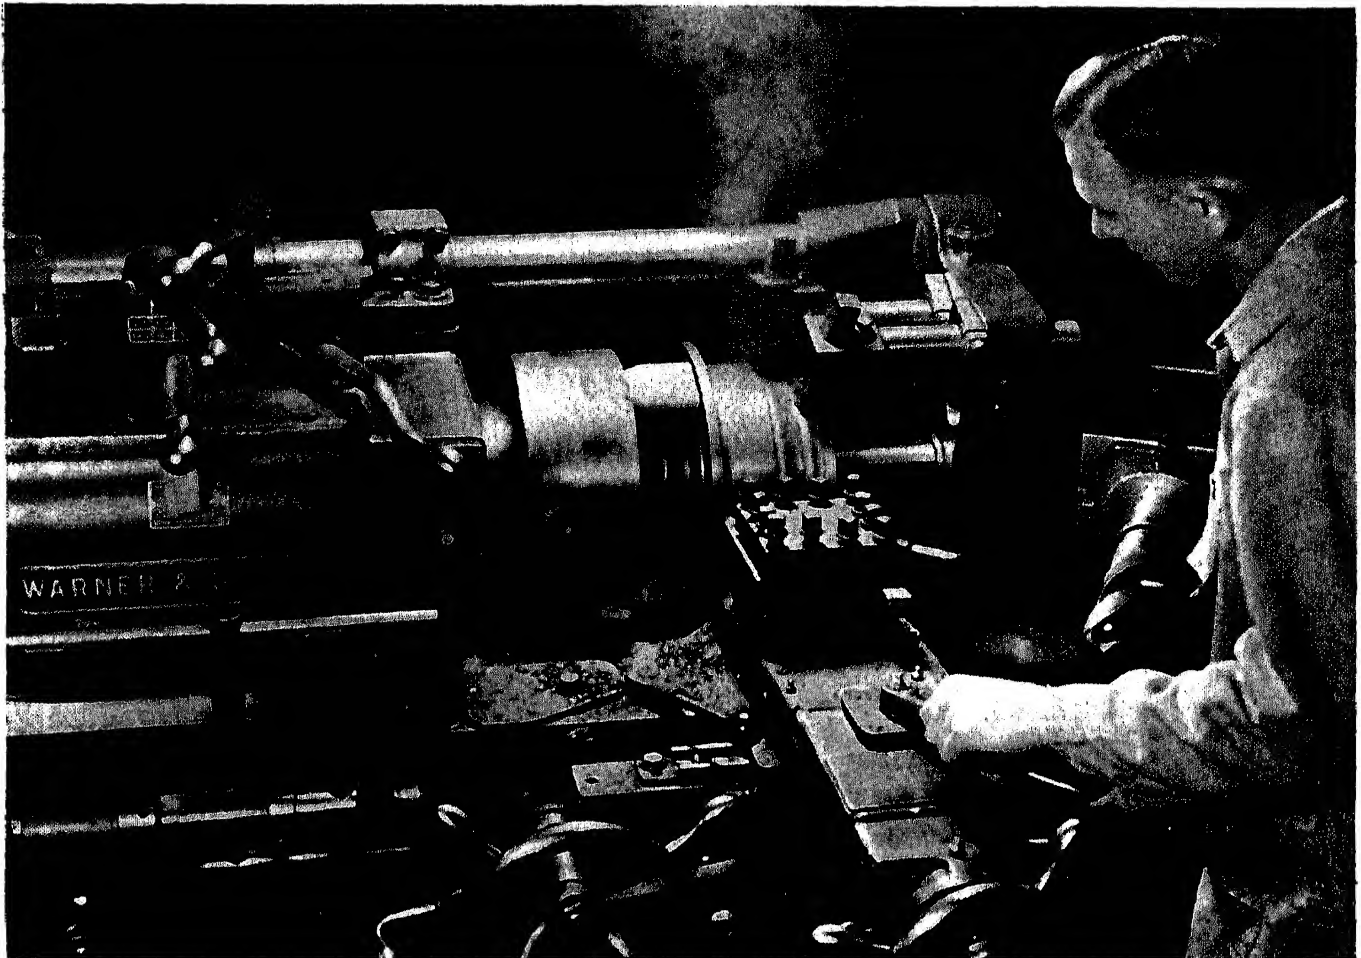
Multiple internal and external cuts from the hexagonal turret combined with a cut taken by a tool in the square cross slide turret on a turret lathe. (Courtesy The Warner and Swasey Co.)
